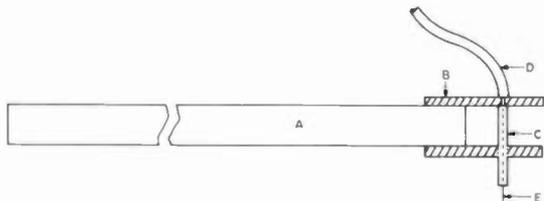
Stylus holder details. (A) 3-1/4" piece of 1/4" steel rod stock (left over after the drum shaft has been cut to size). (B) 3/4" piece of 3/8" o.d. plastic tube stock. (C) 1/2" piece of 1/16" tube stock (stylus holder). (D) length of hookup wire soldered to one end of (C). (E) Wire stylus inserted into (C).
